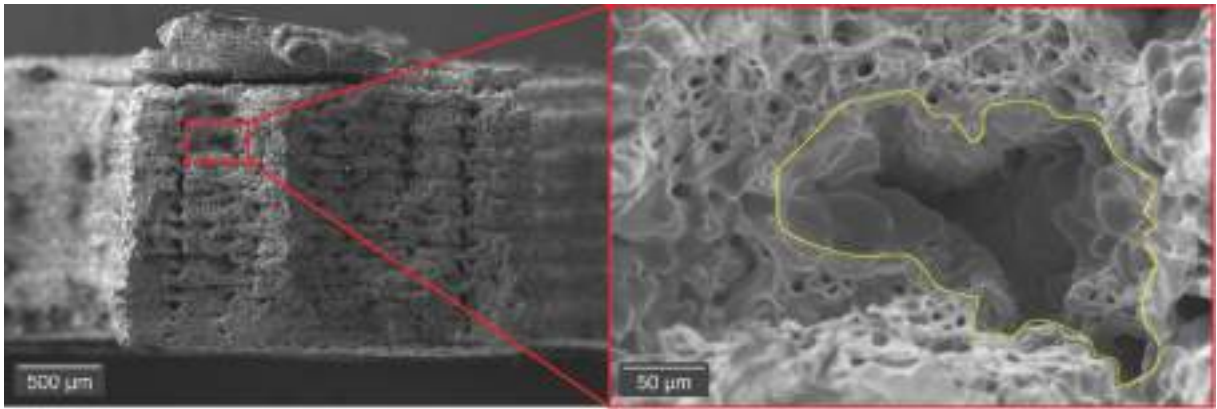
Smooth untouched pore (highlighted in yellow) surrounded by dimples showing ductile fracture.
